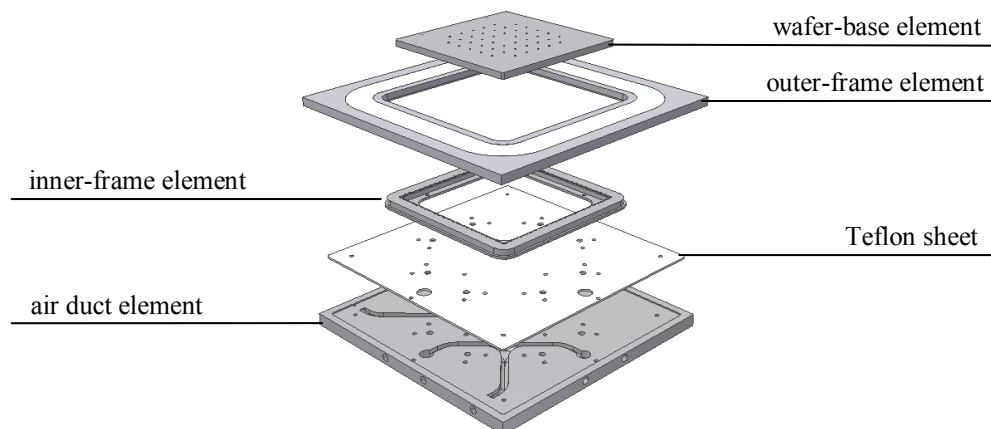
Explode view of the assembly device. It is composed by five units: the wafer-base; the outer frame; the inner frame, the Teflon sheet and the air duct element.
